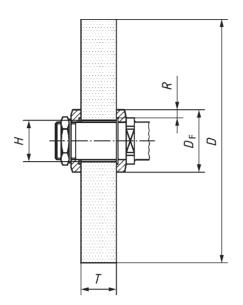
Clamping flanges for mounting abrasive products with small bore $(H \le 0, 2D)$
